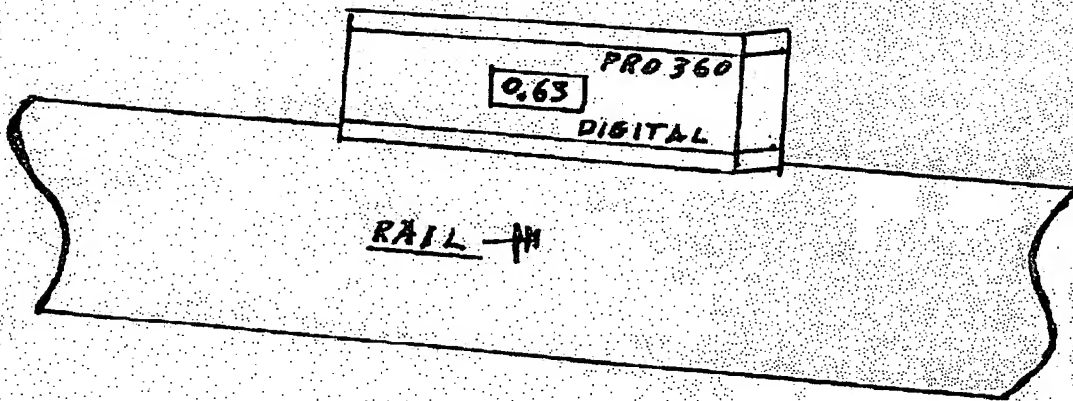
CHECKING ANGLE OF FRAME RAIL
